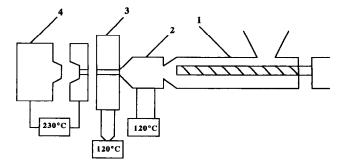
Set-up of modified injection moulding unit: 1, injection moulding unit; 2, nozzle; 3, thermal barrier; 4, injection moulding die.
